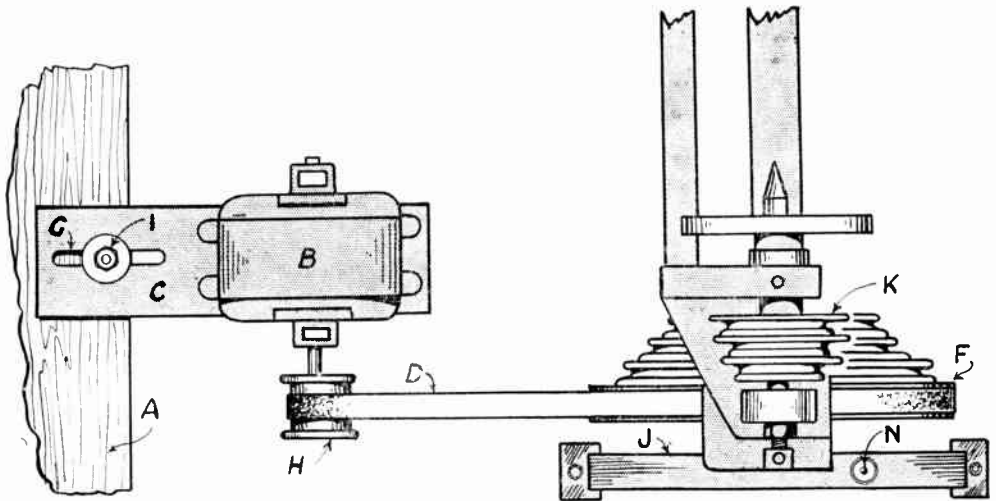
PLAN OF MOTOR DRIVE FOR FOOT LATHE.
